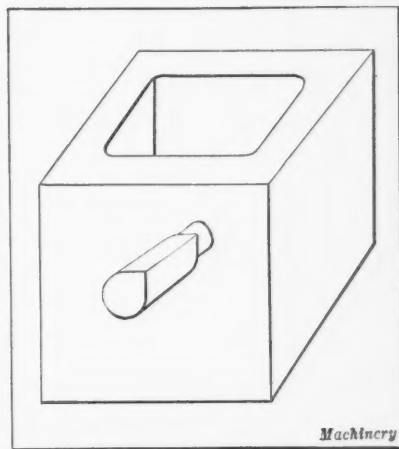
Fixture used in grinding the Flat Sides of the Gage shown in Fig. 1
